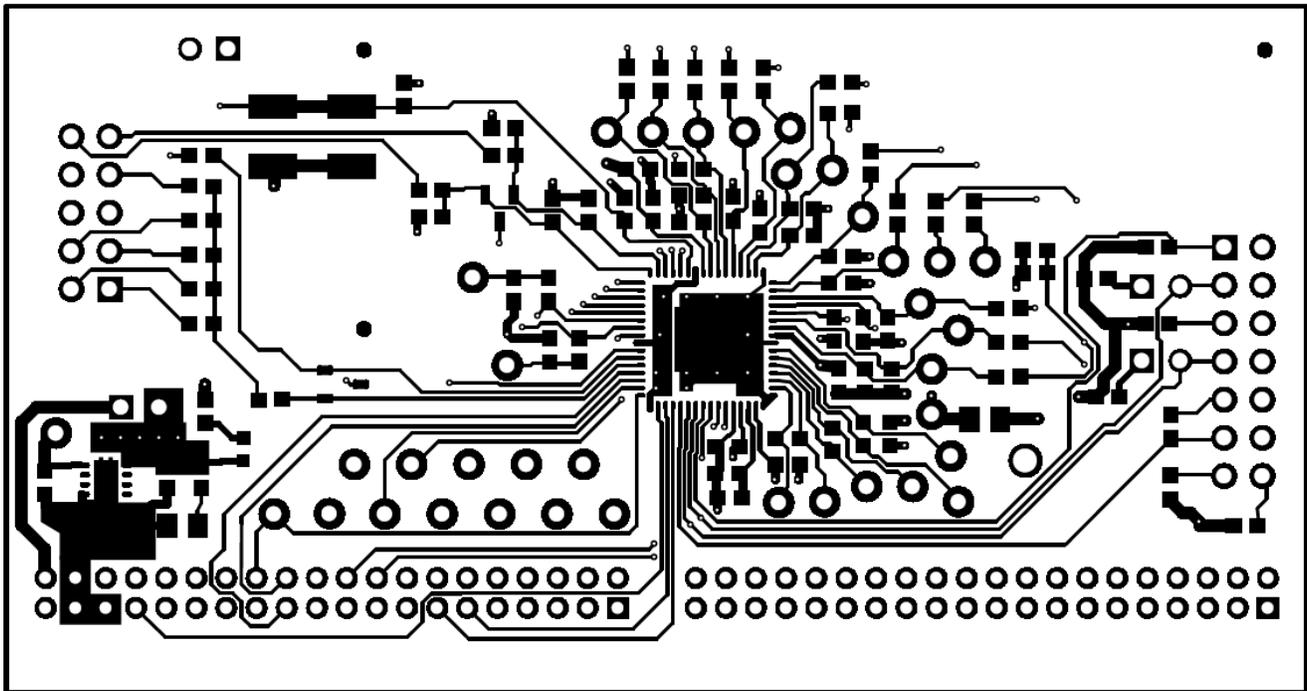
UCD3138064AEVM149 Top Copper (Top View)
